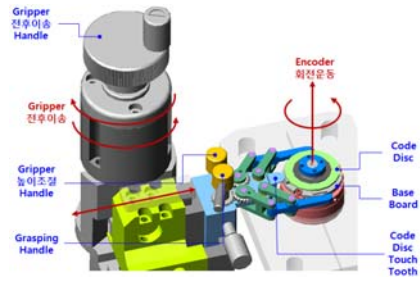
Code Disc Touch Tooth for Code Disc onto The Gripper Tip
